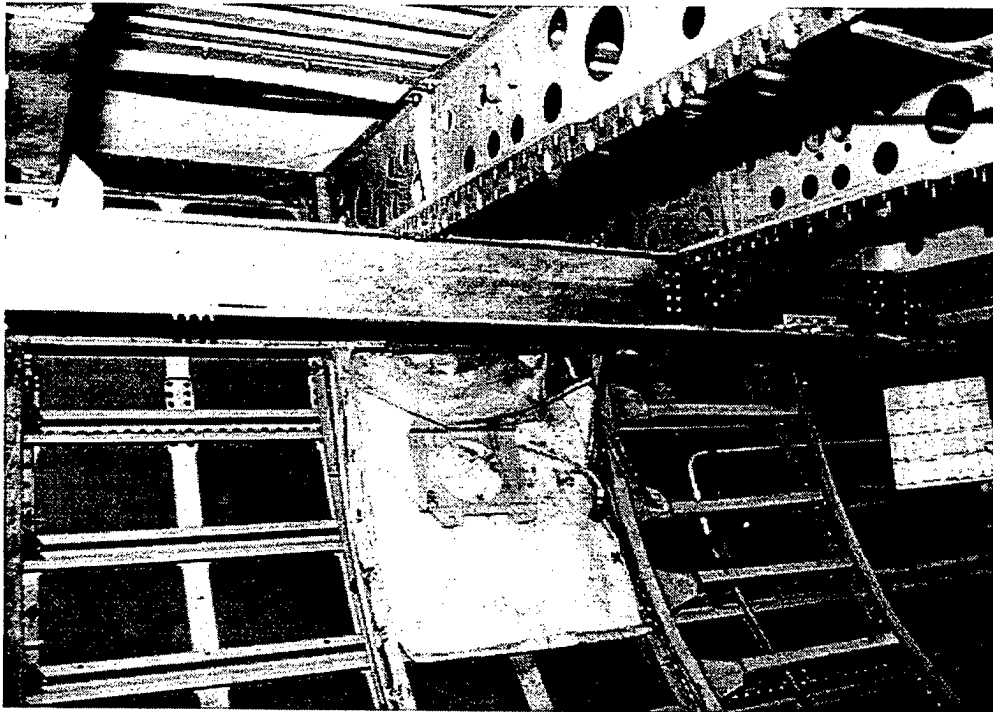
POSTTEST AUXILIARY FUEL TANK LEFT ATTACHMENT
